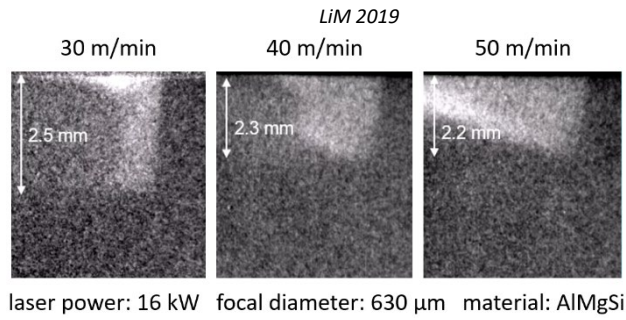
Three capillaries during welding of AlMgSi with 16 kW laser power and a focal diameter of 630 μm, observed by X-ray technique; Fetzer et al., 2018
